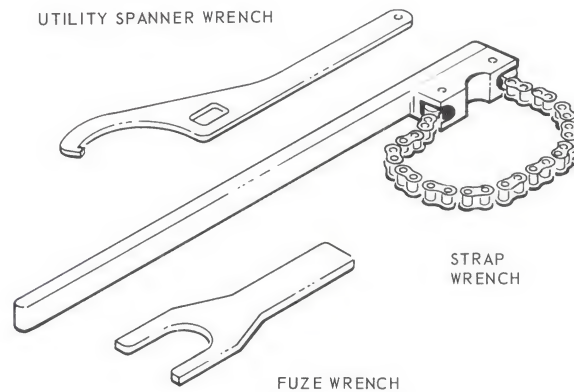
Special Rocket Tools: Utility Spanner Wrench, Typical Fuze Wrench, and Strap Wrench.
